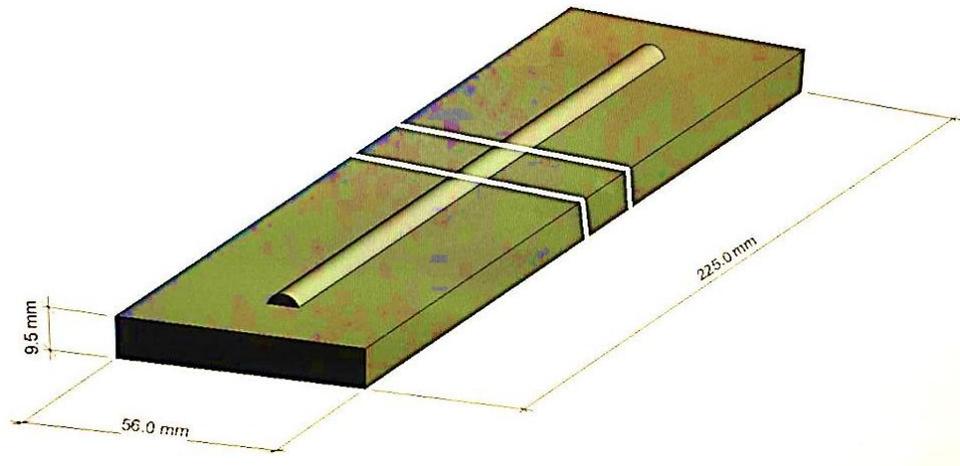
Dimensions of the test piece and sectioning of the welded surface.
